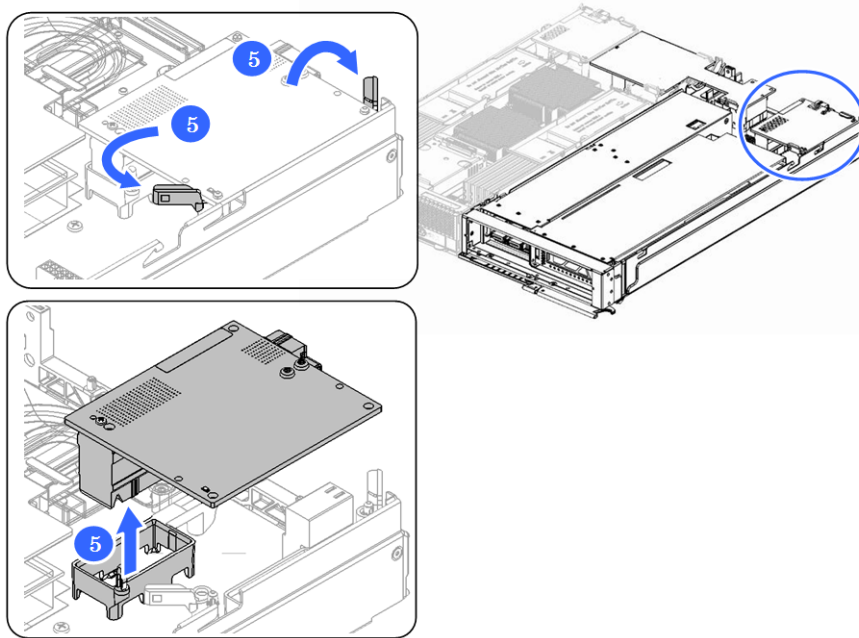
Removing the mezzanine card- PCI expansion blade
